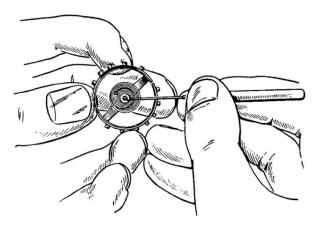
Removing Balance Spring by Placing Lever Under the Collet
